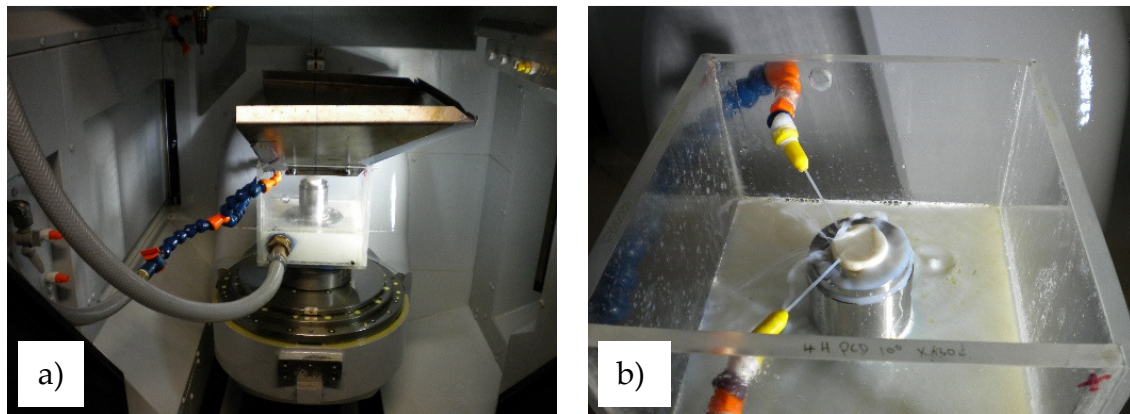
a) Self-contained cooling system installed in machine; b) Close up of coolant acting on the workpiece
